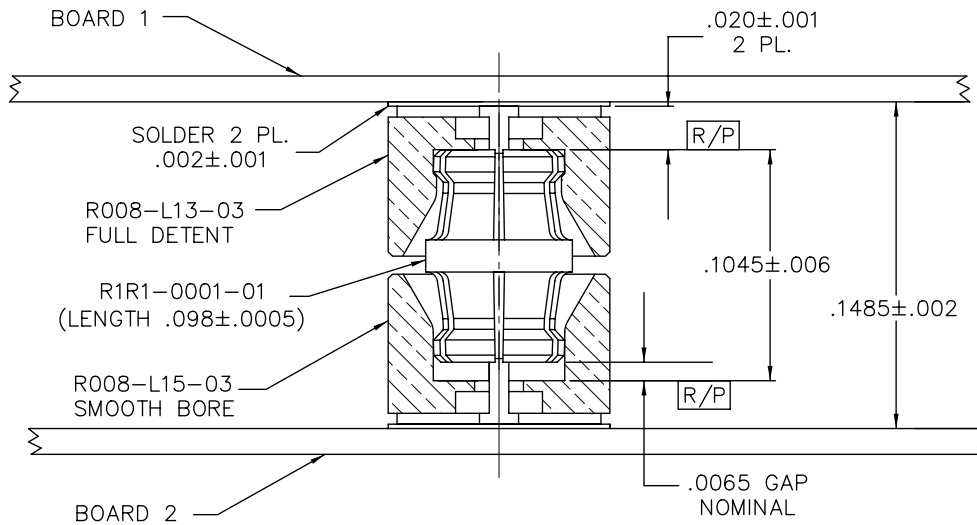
G3PO Board-to-Board Tolerance Analysis
